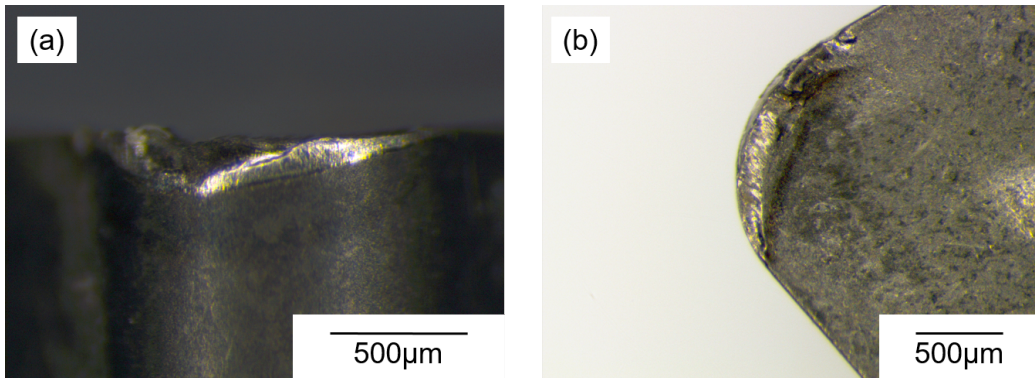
Microscope images showing the degree of tool wear after trial 1.2.4 on billet 4.1. Showing (a) the flank face and (b) the rake face.
